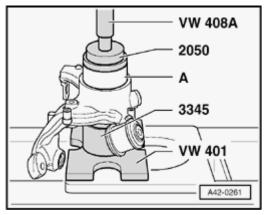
Pressing Wheel Bearing Into Wheel Bearing Housing Courtesy of VOLKSWAGEN UNITED STATES, INC.
